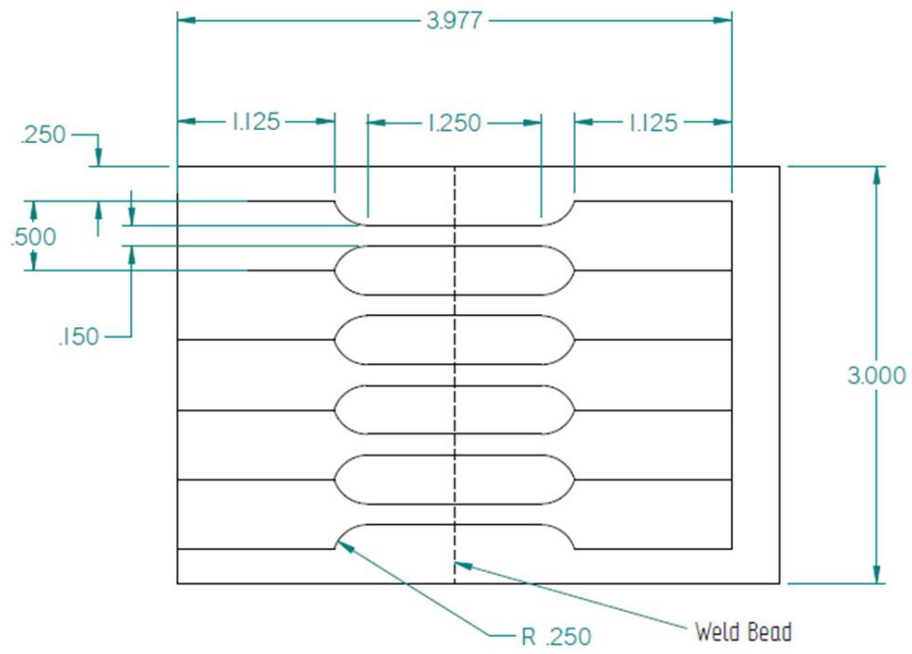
EDM pattern for cutting tensile samples from 304 SS/NiTi TIG weld, all dimensions in inches.
